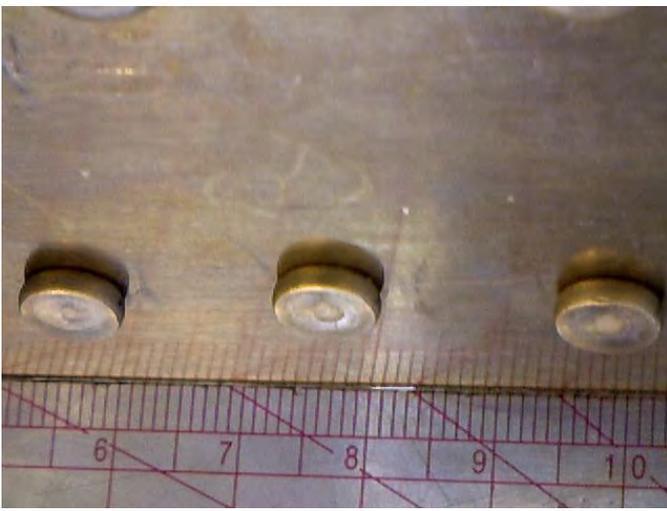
Formed tails of 3/16 universal head rivets are consistent
